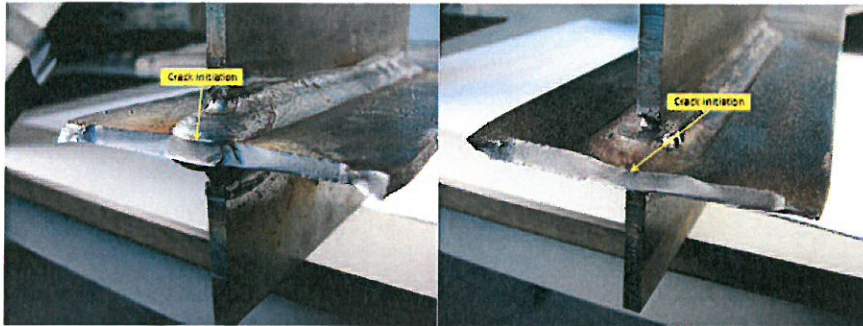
• Fatigue failure in a non-treated weld (left) and in a TIG-dressed weld (right). The post-weld treated joint performed better during fatigue testing.
